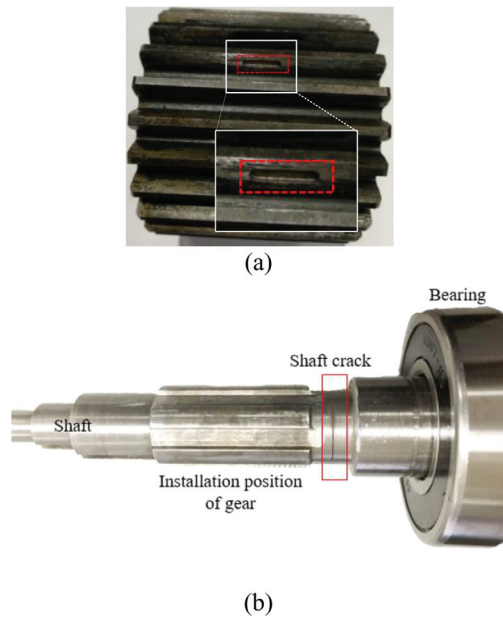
Gear and shaft used in experiment: (a) spalling gear and (b) cracked shaft.
